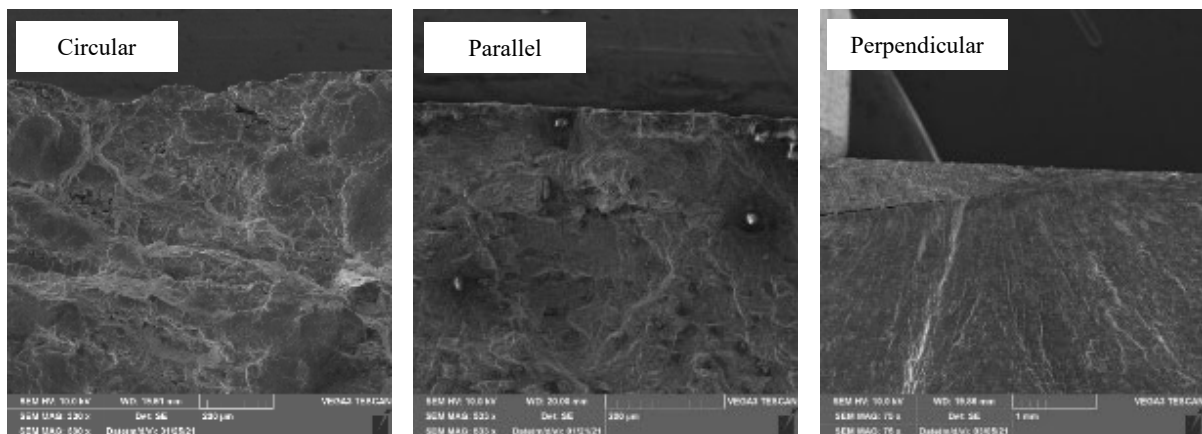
Fracture surface of circular, parallel, and perpendicular raster pattern.
